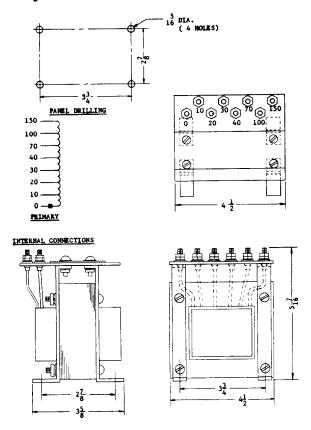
(0207A5465-0) Outline and Panel Drilling Dimensions of the Auxiliary Transformer used with the GCXG53A Relay
